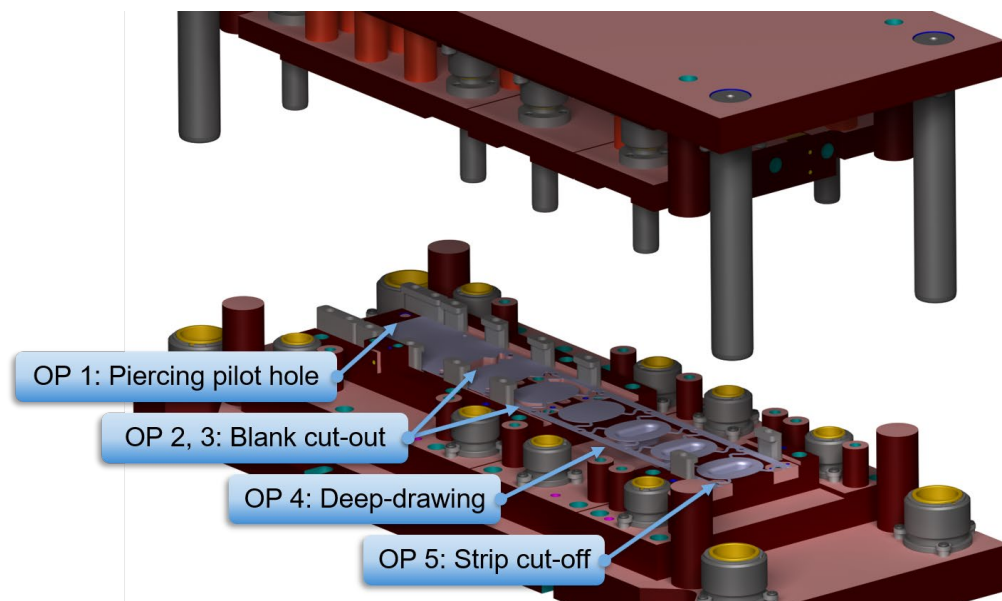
Design draft of the planned progressive die with sheet metal strip
